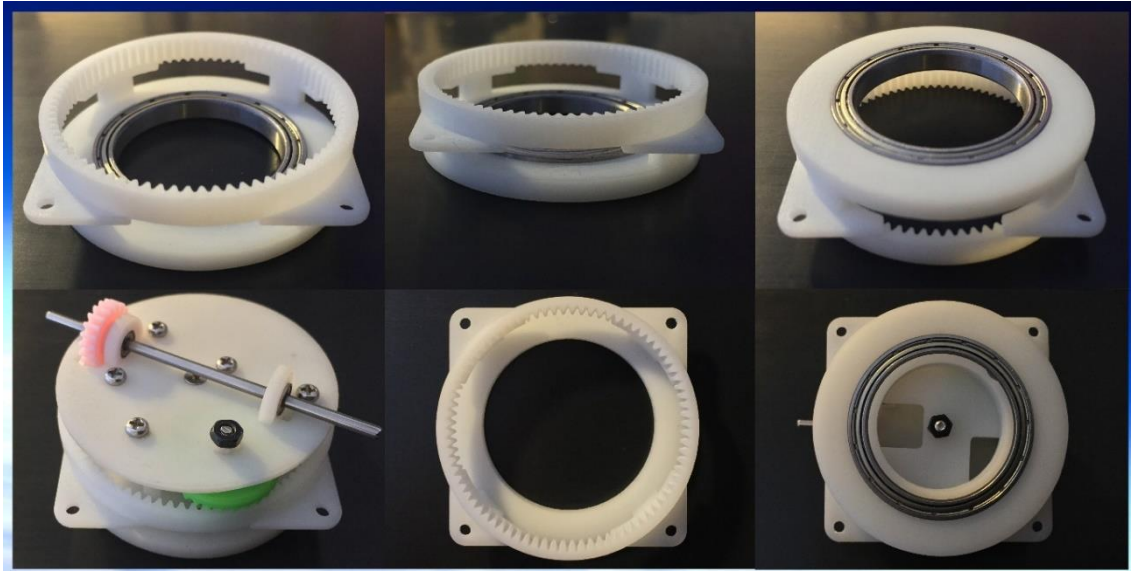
The detail view of Stereolithography 3D printed internal gear structure and its assembly
